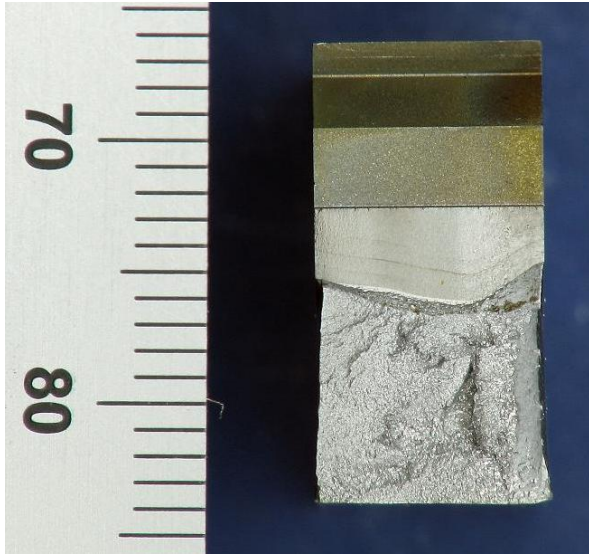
Fracture surface of tests without lateral compression.
